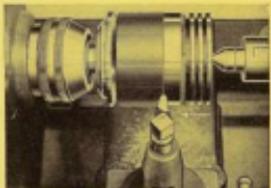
Finishing a Semi-Machined Cast Iron Piston Mounted on the Piston Adapter.
